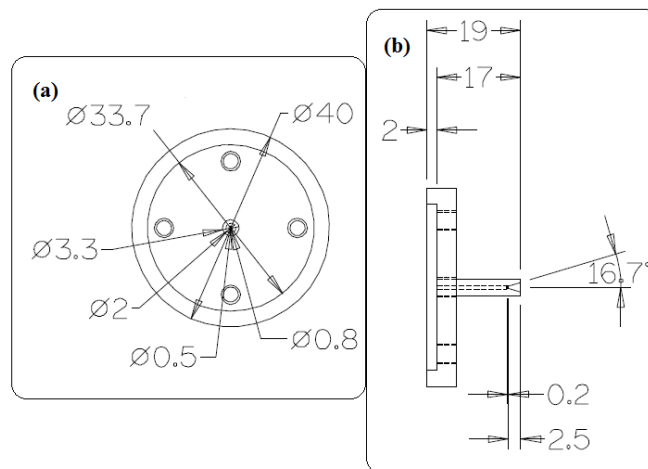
(a) Top-view and (b) side-view of the brass gas-jet nozzle. Length units in mm.
